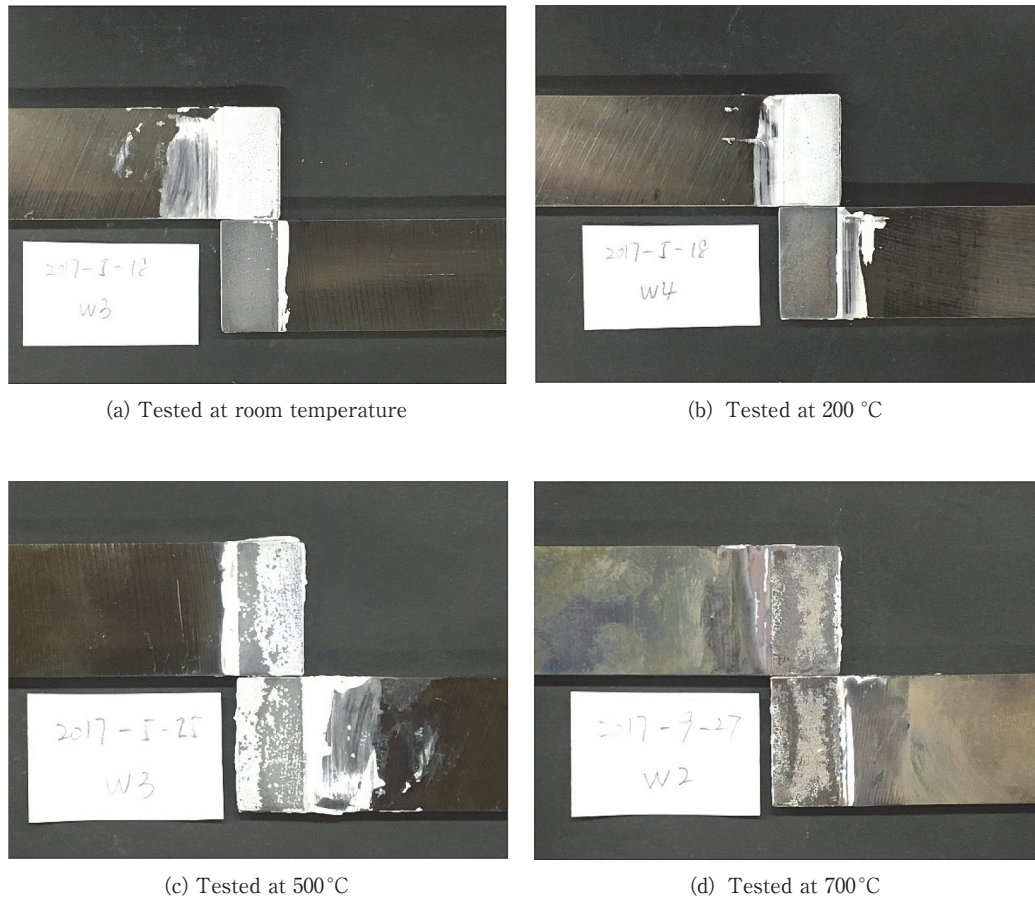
Fractured surface of single lap joints after tensile test at elevated temperature (SUS430)
